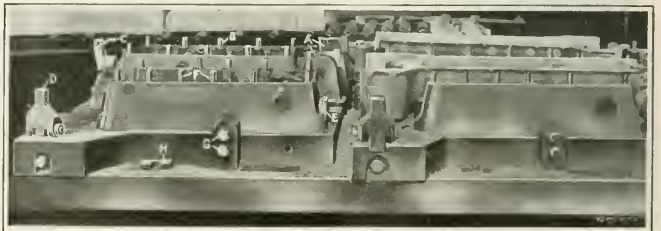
Close View of Fixtures in which Work is held for First Operation
